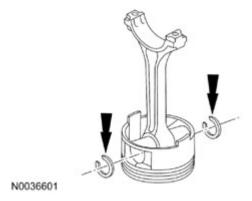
Locating Piston Pin Clips Courtesy of FORD MOTOR CO.
